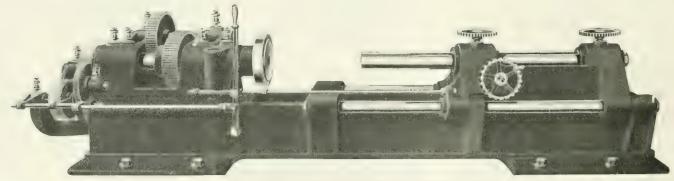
SINGLE PURPOSE MACHINE FOR TURNING SHELLS FROM 4.5 IN. to 12 IN. DIA.
